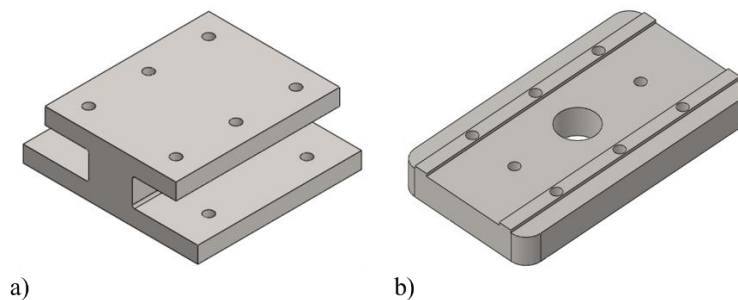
Steel parts that allow the connection of the structural support with a) the drop-weight and b) universal testing machines
